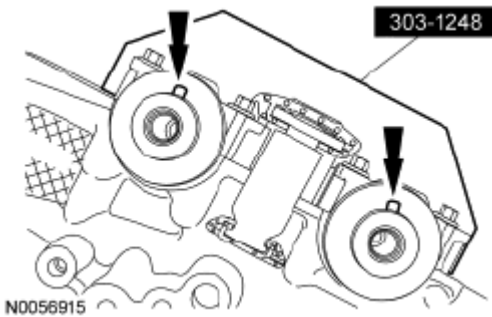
Identifying Camshaft Holding Tool Onto Flats Of Camshafts
